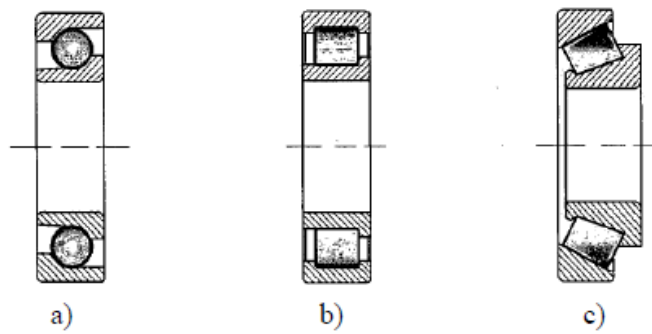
Radial - axial bearings: a) the ball; b) the roller; c) the cone [5]
